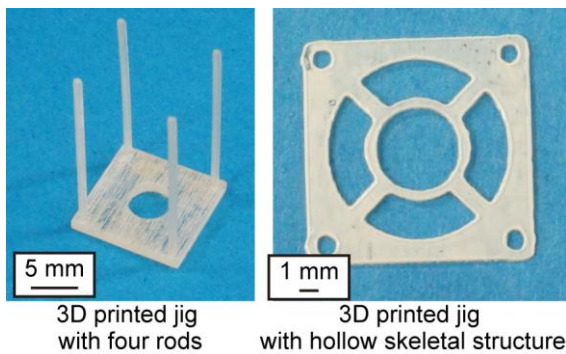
Photographs of the 3D printed jigs with four rods and hollow skeletal structures.
